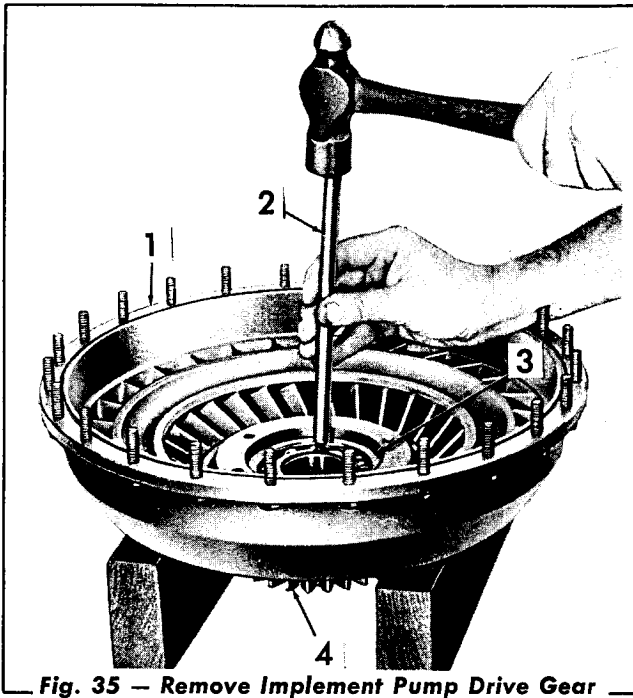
Remove Implement Pump Drive Gear from Converter Pump
